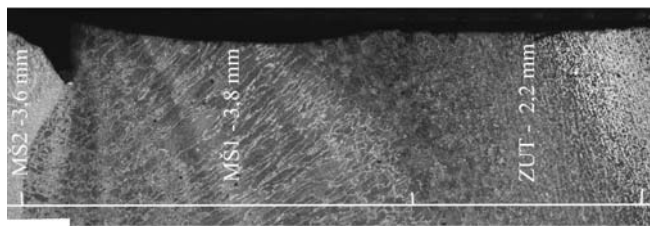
Welded joint section, normal to fracture of lug, pos. 68.
